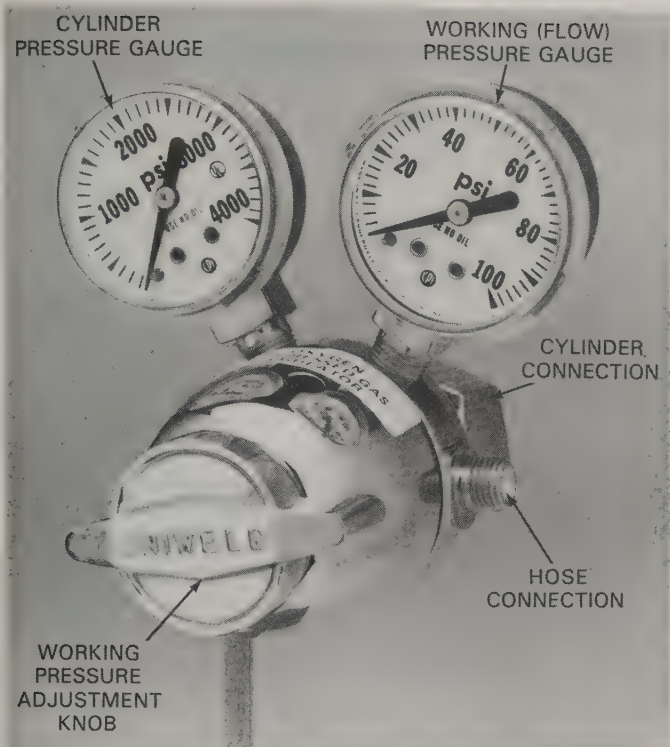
An oxygen regulator is designed to reduce the high-pressure flow of gas from the cylinder to a much lower-pressure flow through the hose and torch. It has separate gauges for the cylinder pressure and the working (flow) pressure. Adjustment of the working pressure is done with a knob on the front of the regulator. (Uniweeld)
